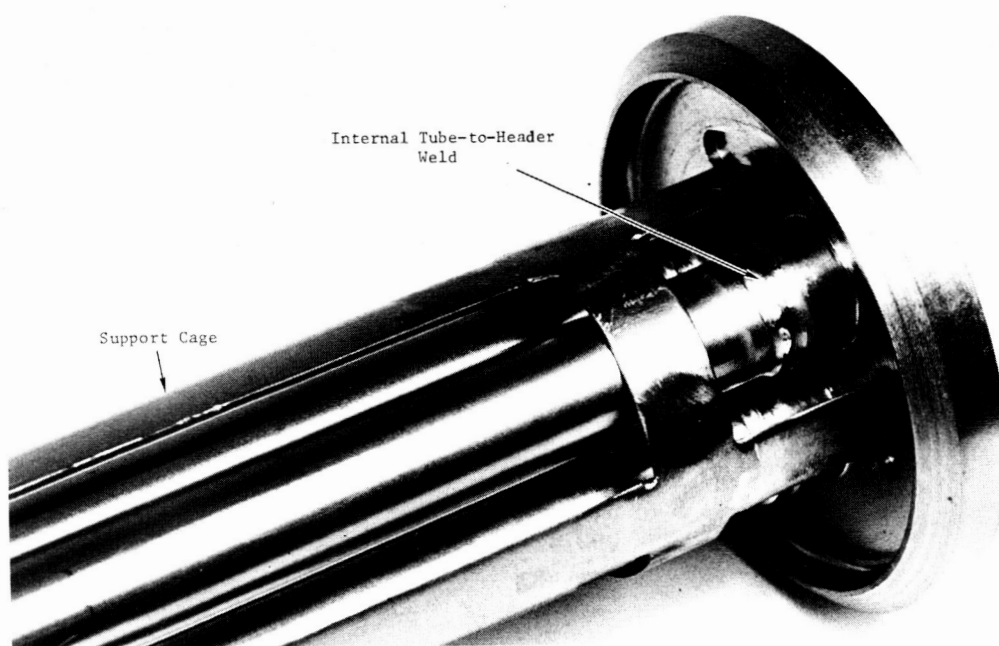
T-111 three-tube condenser potassium inlet header.
